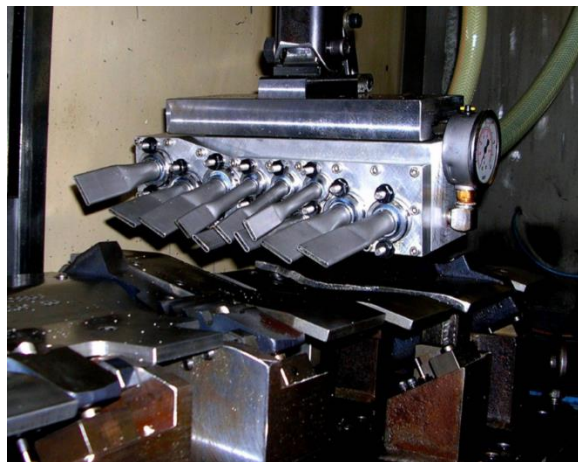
A manifold array of flat nozzles for creep feed grinding [32]
